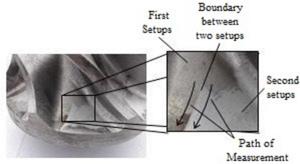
Boundary between two workpiece setups (1,2) and path of measurement CMM
